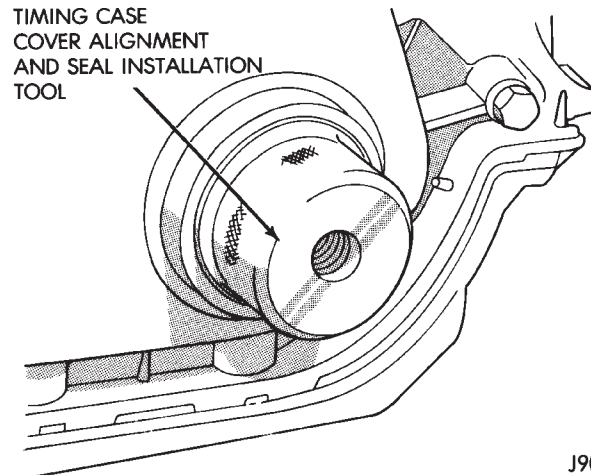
Timing Case Cover Alignment and Seal Installation Tool 6139
